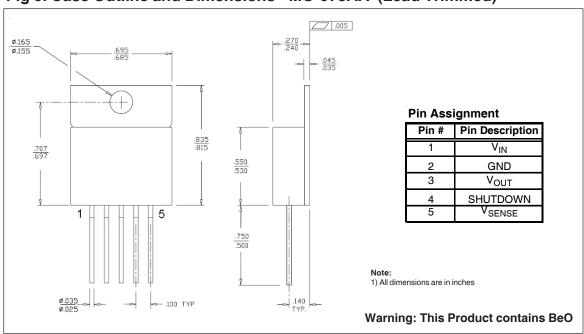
Case Outline and Dimensions - MO-078AA (Lead Trimmed)
